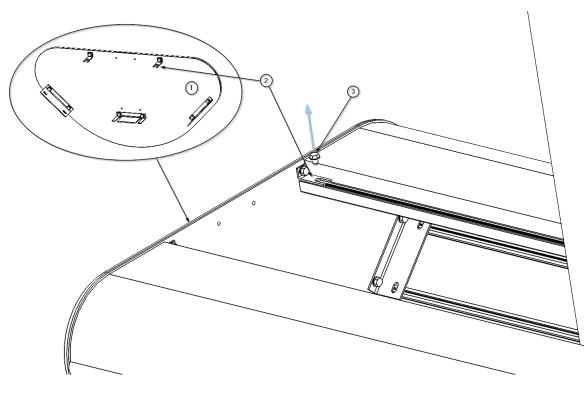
Disassembly/assembly of end caps on ATLAS main body
